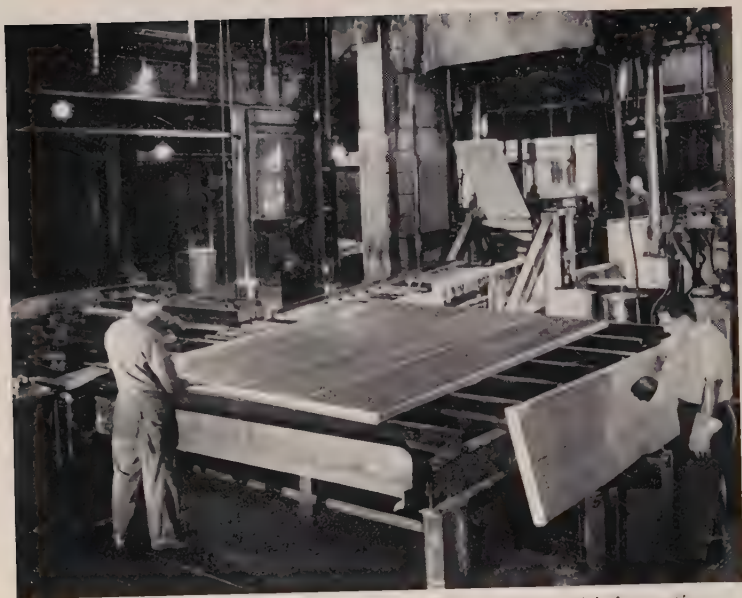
Discharge End of Continuous-Casting Machine, with Inspection.
